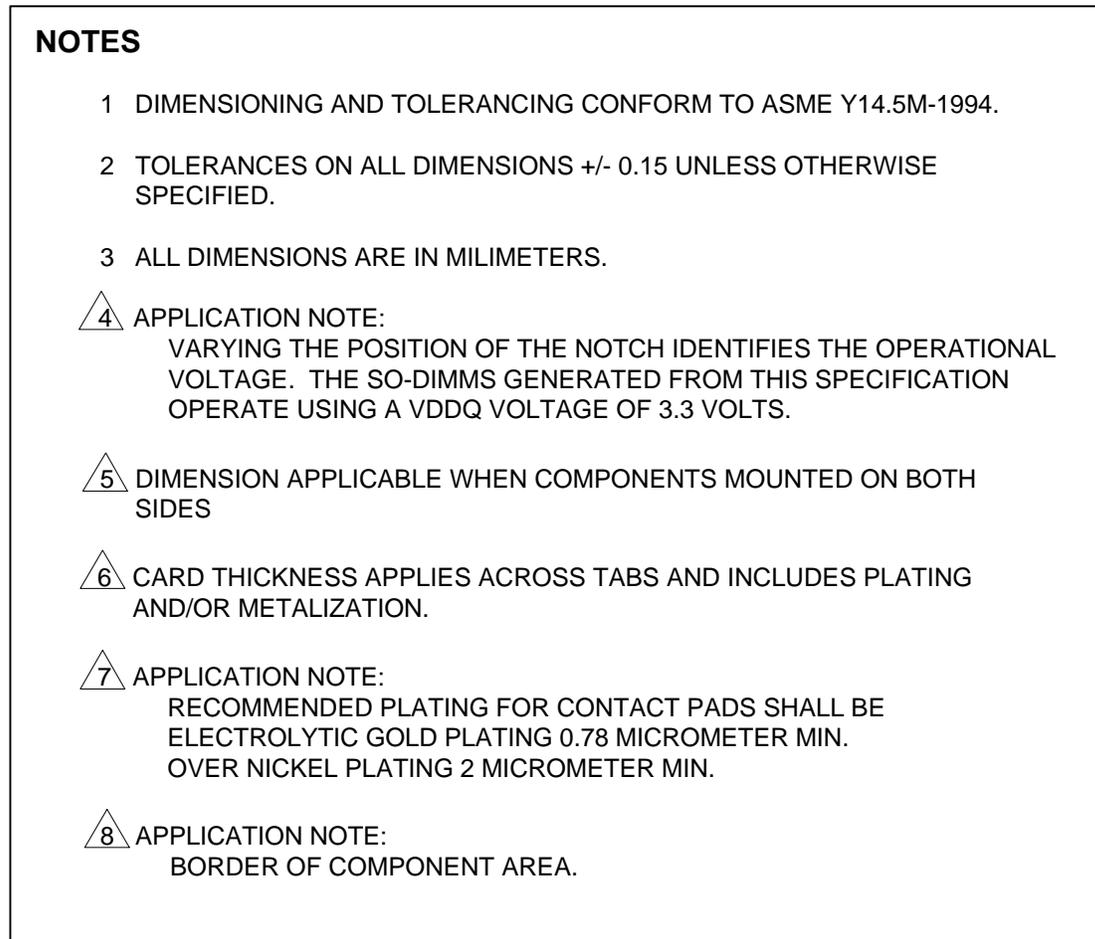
SO-DIMM Mechanical Drawing (5 of 5)
